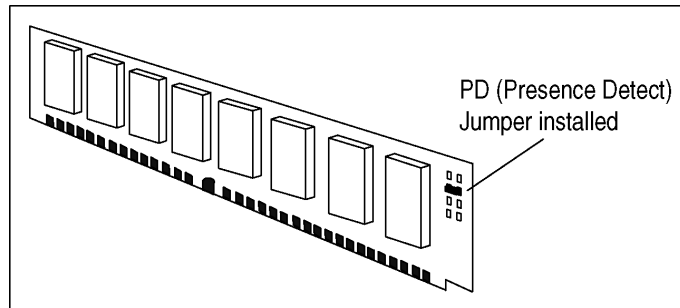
Example of a single-sided SIMM with one PD jumper installed.
